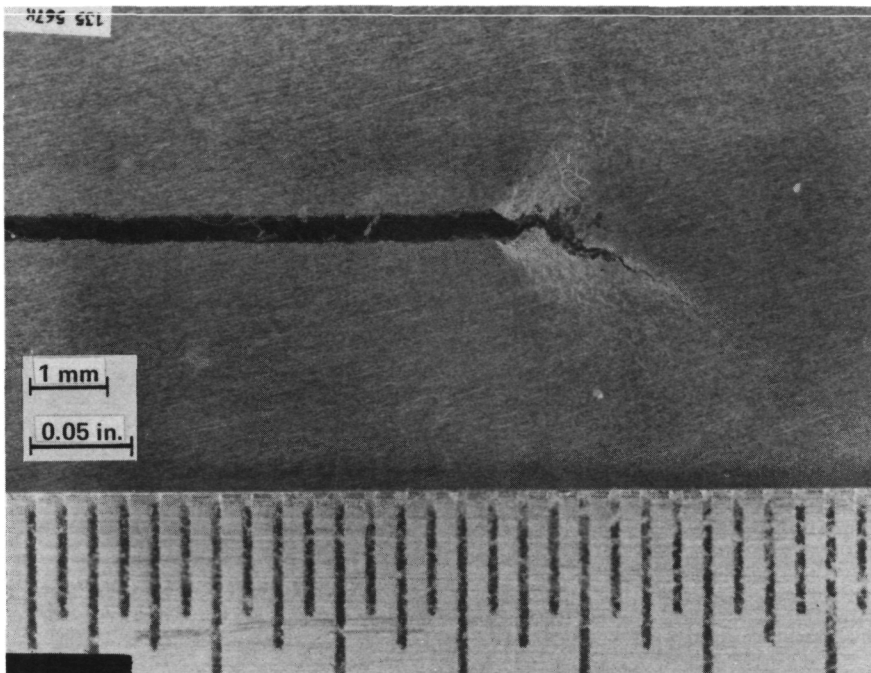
Crack Tip on Bottom Surface of Disk 21 After Test
